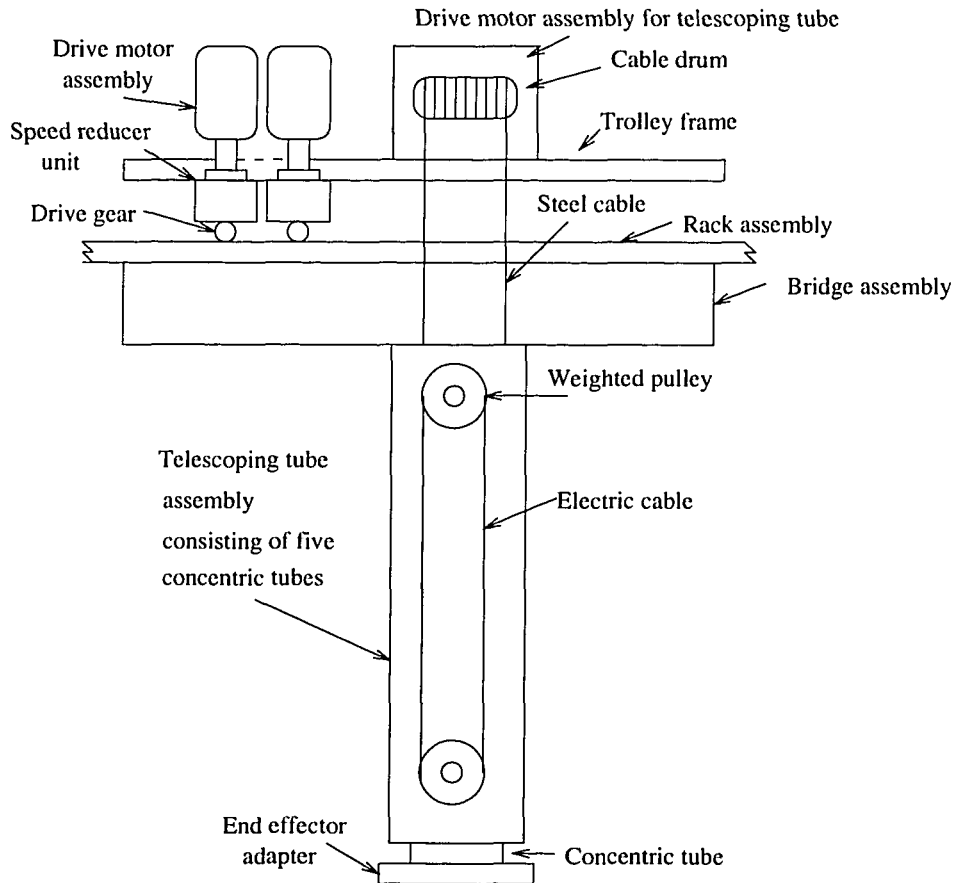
Block diagram of front elevation of Trolley and tele-tube assembly
